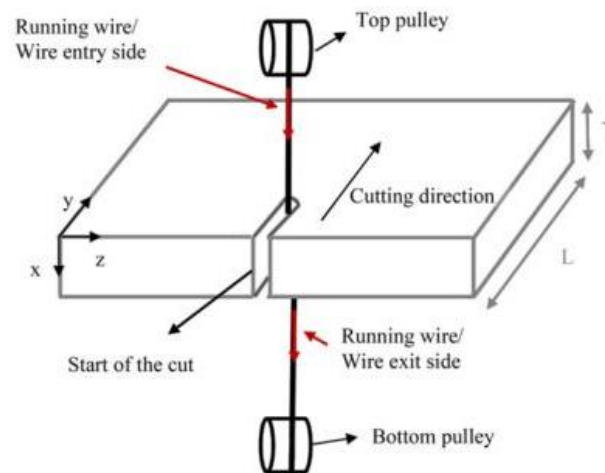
Schematic view of a sample cut using wire EDM [54].
